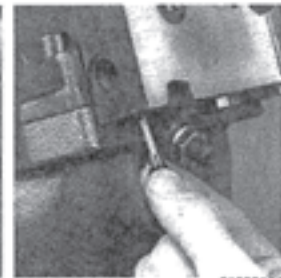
Remove PCOR Defeat Spool Stop Plug
